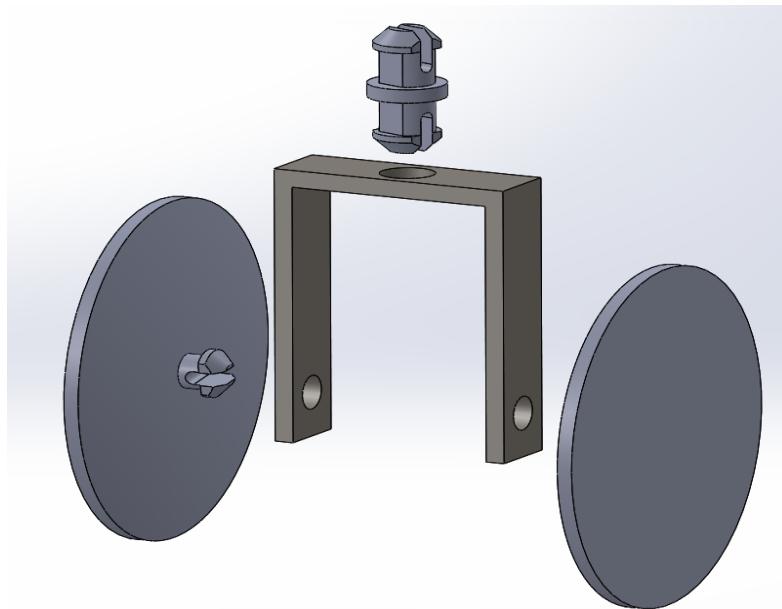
Displays the front wheel assembly exploded view. Both the wheels, clevis bracket, and the bracket mount snap in.
